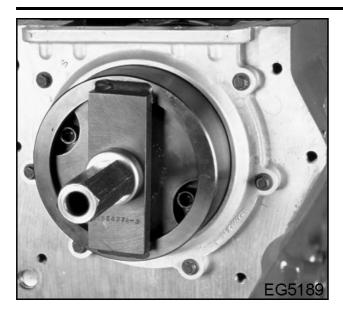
Assemble Rear Oil Seal and Wear Sleeve Installer
